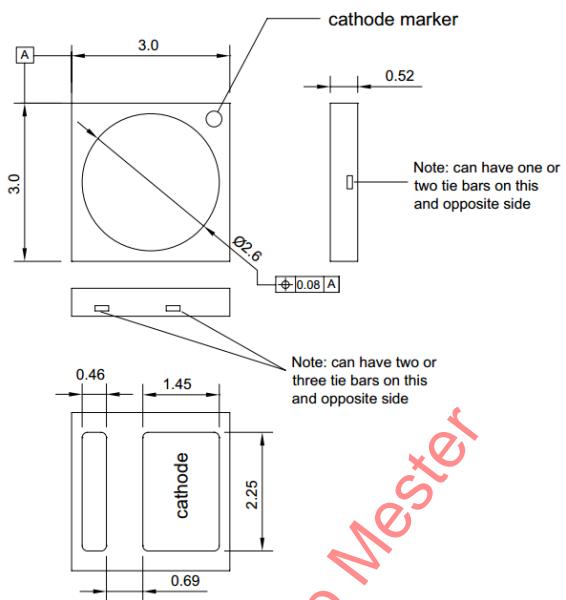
Mechanical Drawing for LUXEON 3030 2D Round LES. All dimensions are in millimeters.
